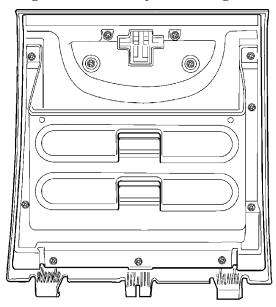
GLOVE BOX ASSEMBLY HINGE
